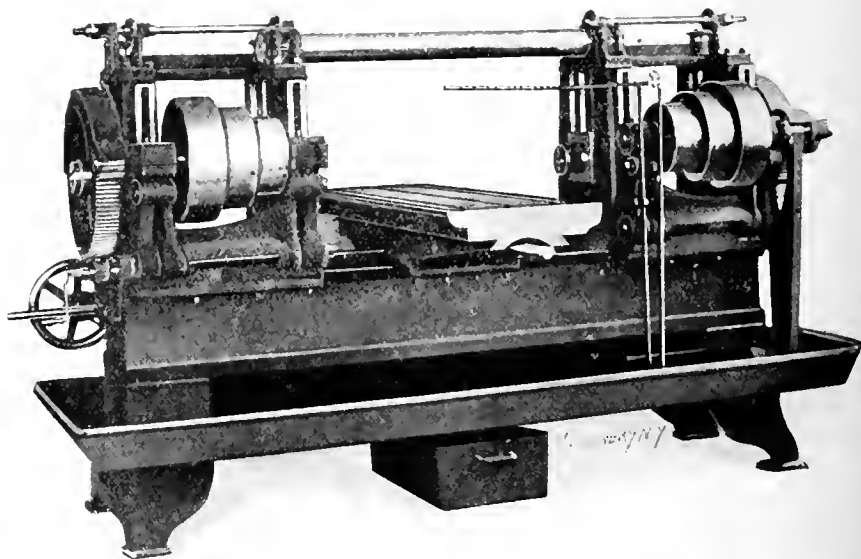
Rear View of the Double-head Lincoln Milling Machine
